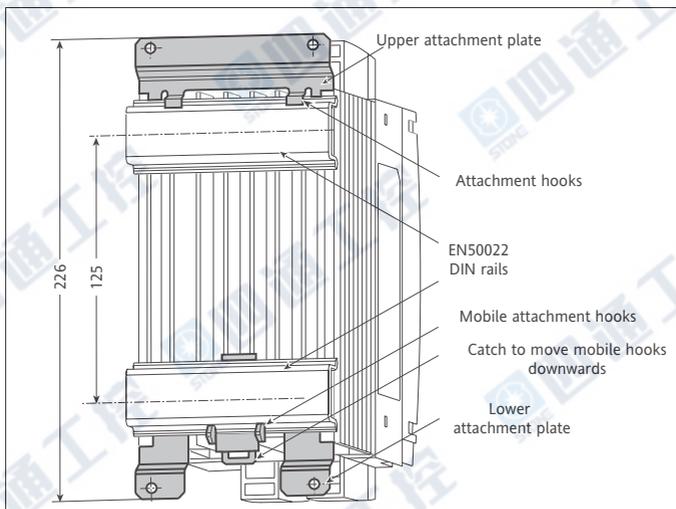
Attaching the 7100A power thyristor unit to DIN rails (80A and 100A, rear view).
